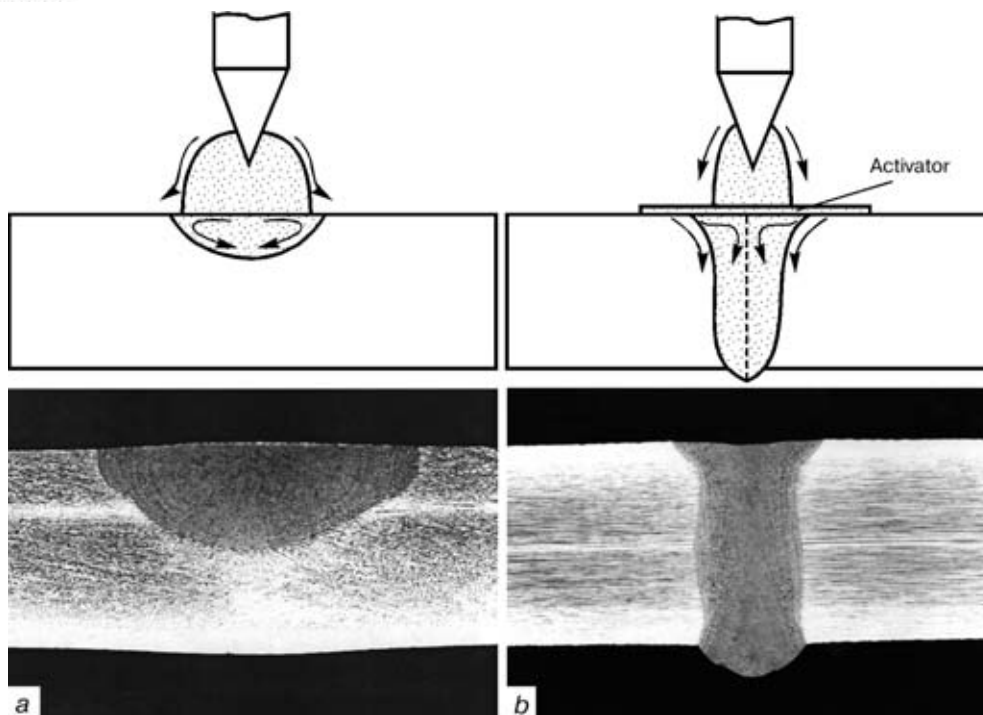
Flow diagram of the arc welding processes and macrosections of welded joints in steel 304L 6 mm thick made by the TIG (a) and A-TIG (b) welding methods
